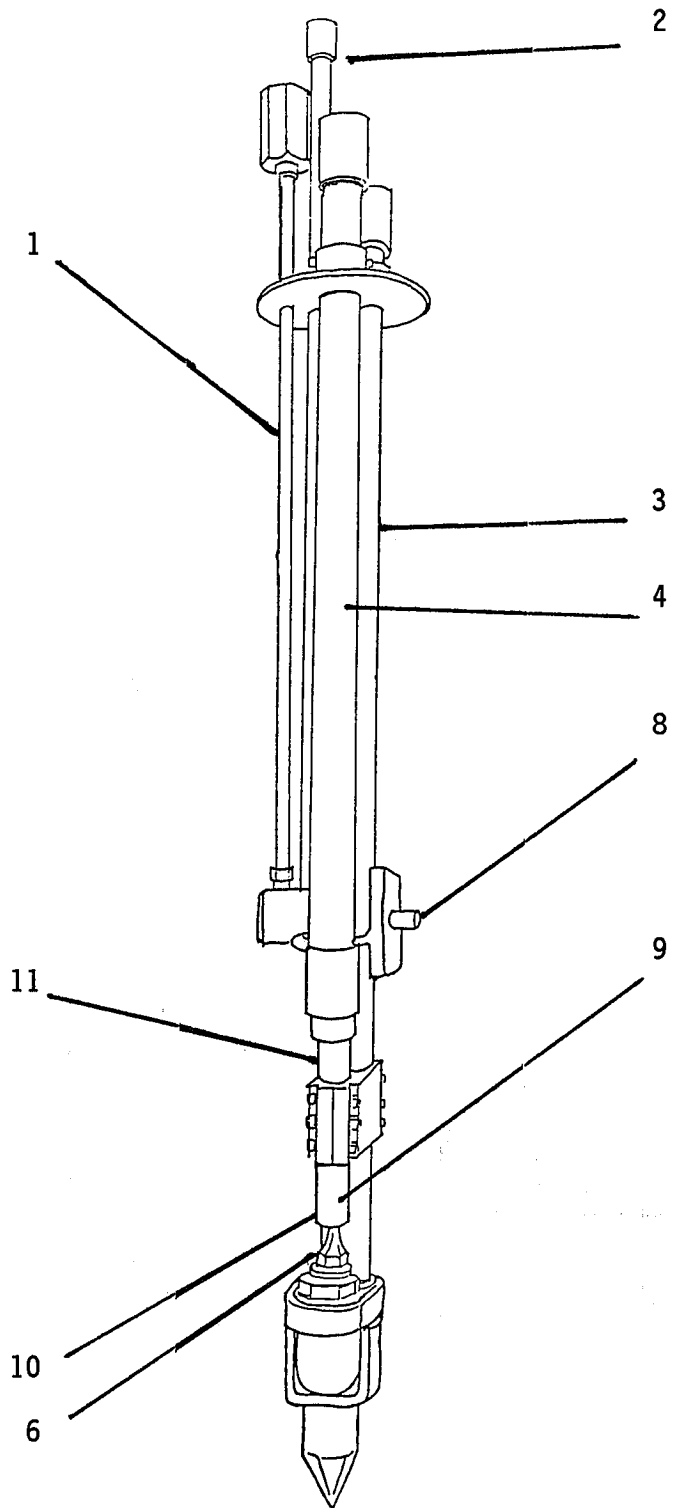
Schematic Drawing of the Abrasive Jet Borehole Miner (Side View).
